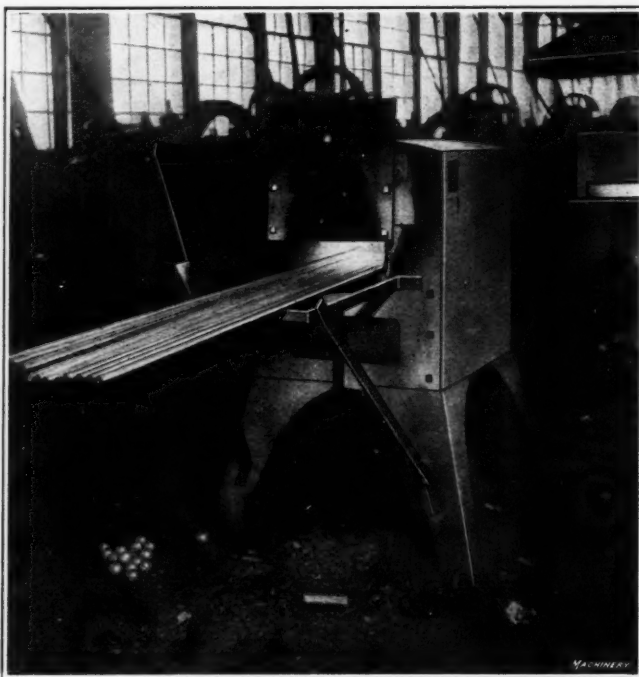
"Frankfort" Oil-heated Furnaces made by Strong, Carlisle & Hammond Co., in which Bars are heated for Hot-forging Operation
